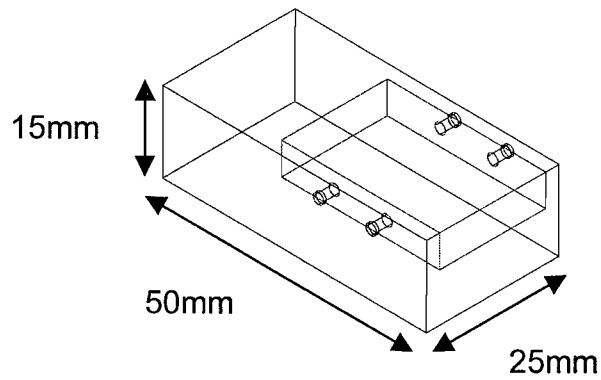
A dummy specimen showing the position of the smaller test specimen. The smaller specimen is held in place by grub screws
